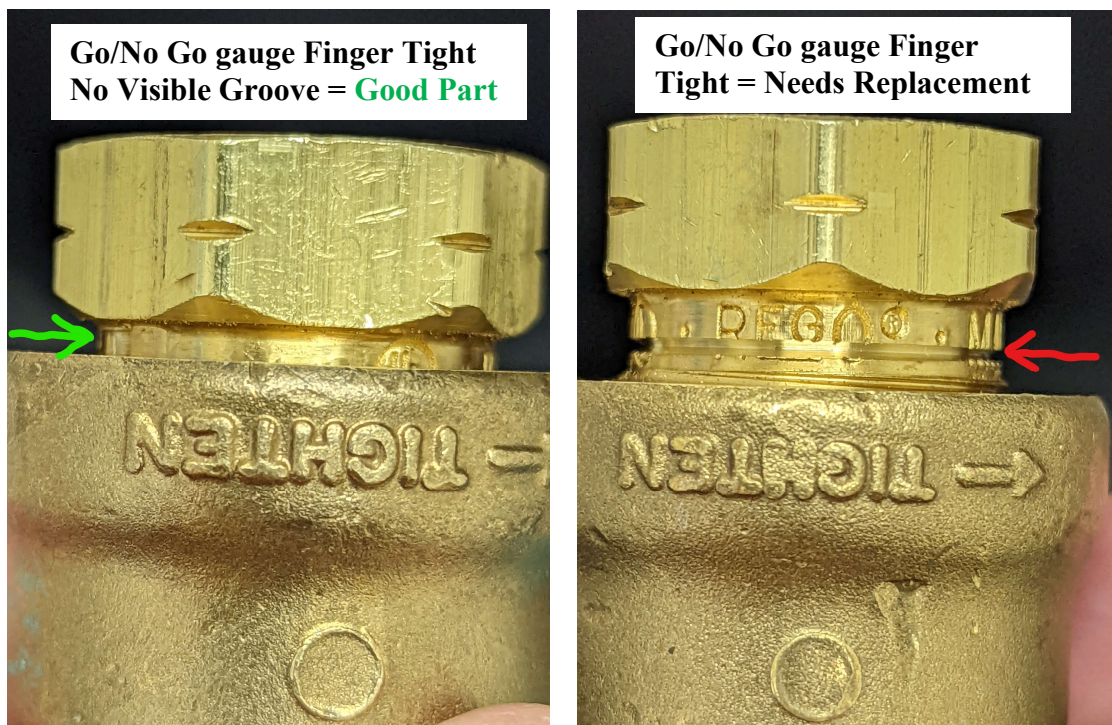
Go/No Go Gauge POL Nut – Groove Cut Through Roll Stamp Information
